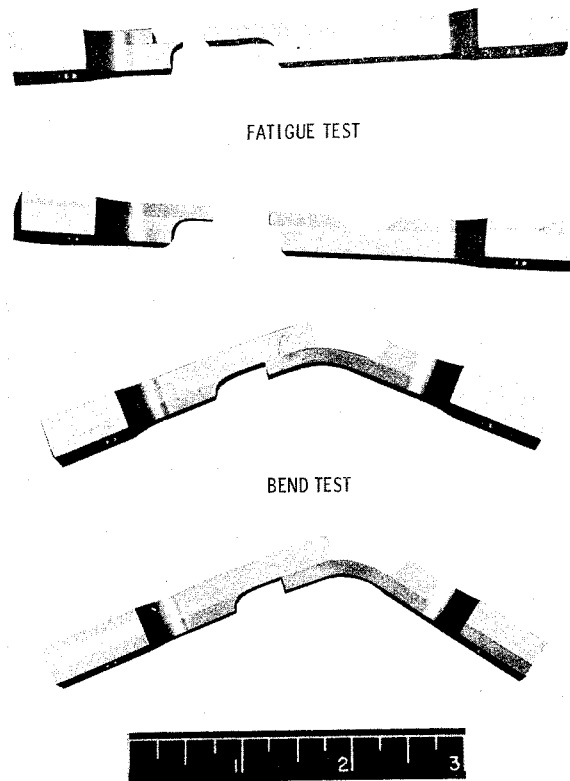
Bar specimens of roll-bond aluminum to stainless steel after fatigue and bend tests.
